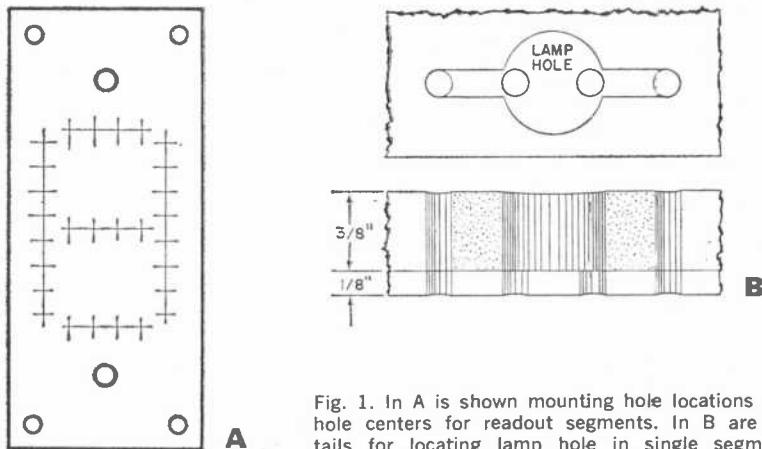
In A is shown mounting hole locations and hole centers for readout segments. In B are details for locating lamp hole in single segment.
